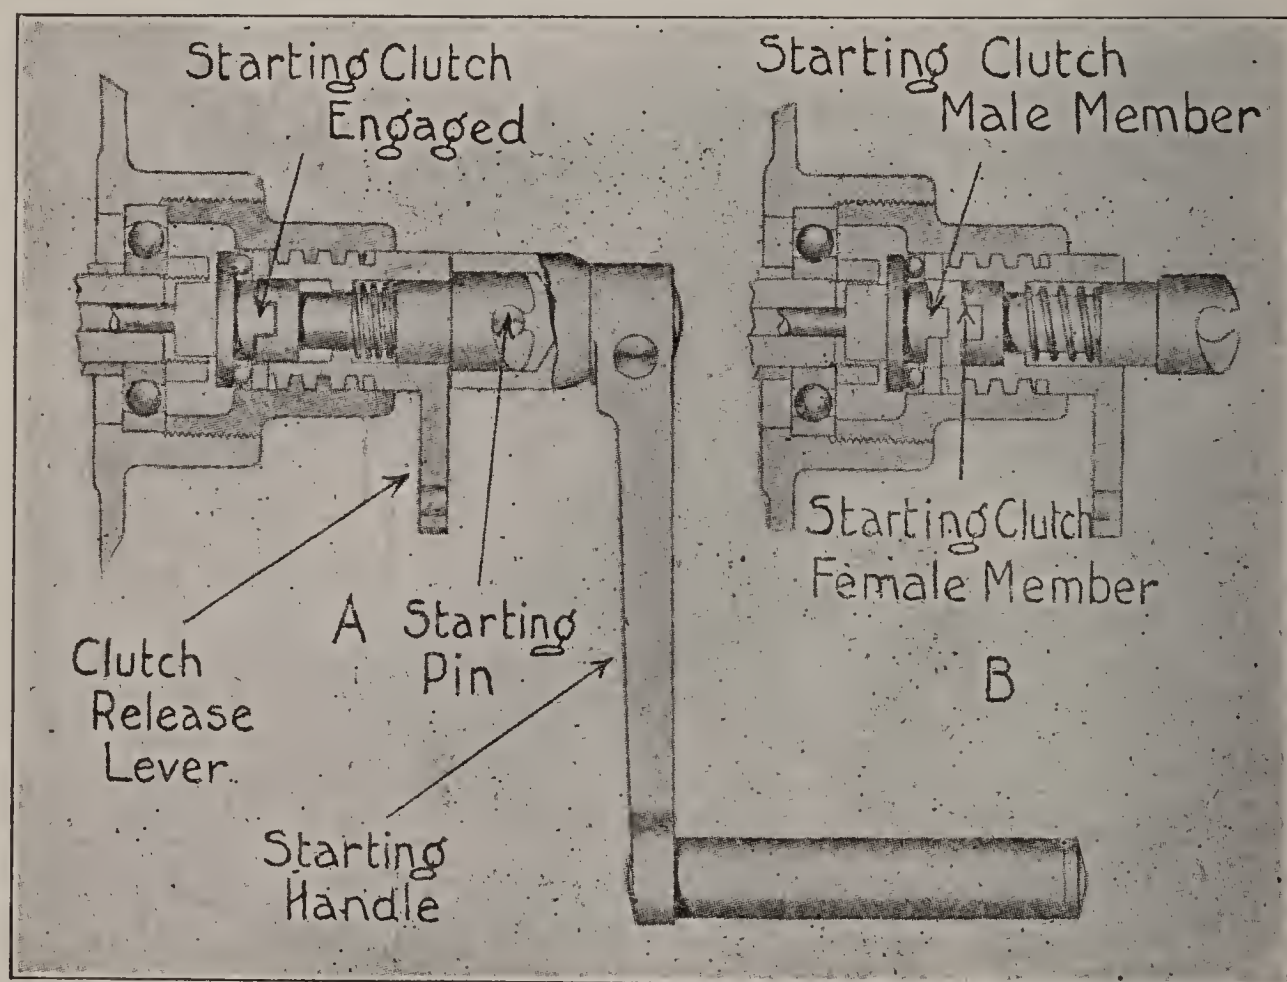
Starting Handle Clutch Arrangement Used in Connection With Jardine Two Speed Gears.
